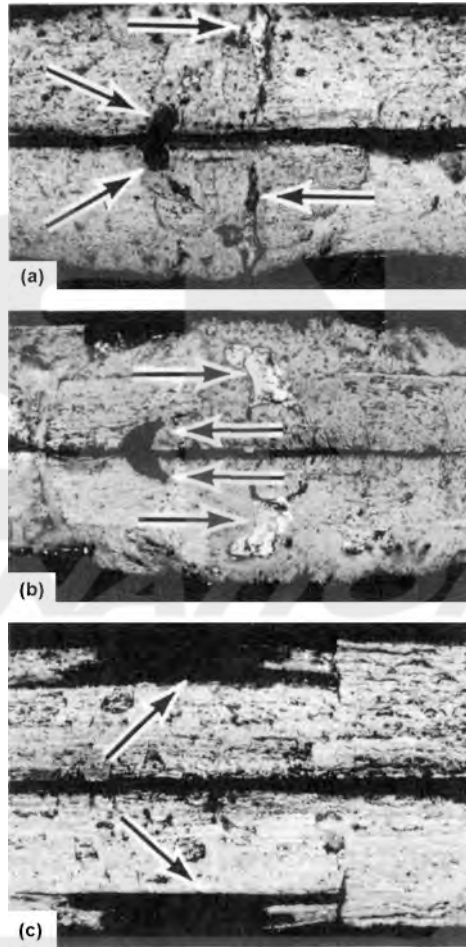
Mating fracture surfaces of pipe or tube welds showing imperfections detectable by eddy current inspection, (a) unwelded spot (diagonal arrows) and a nonpenetrating pinhole (horizontal arrows); (b) unwelded spots, probably caused by entrapped foreign matter; (c) surface crack in weld. Source: Ref 1
